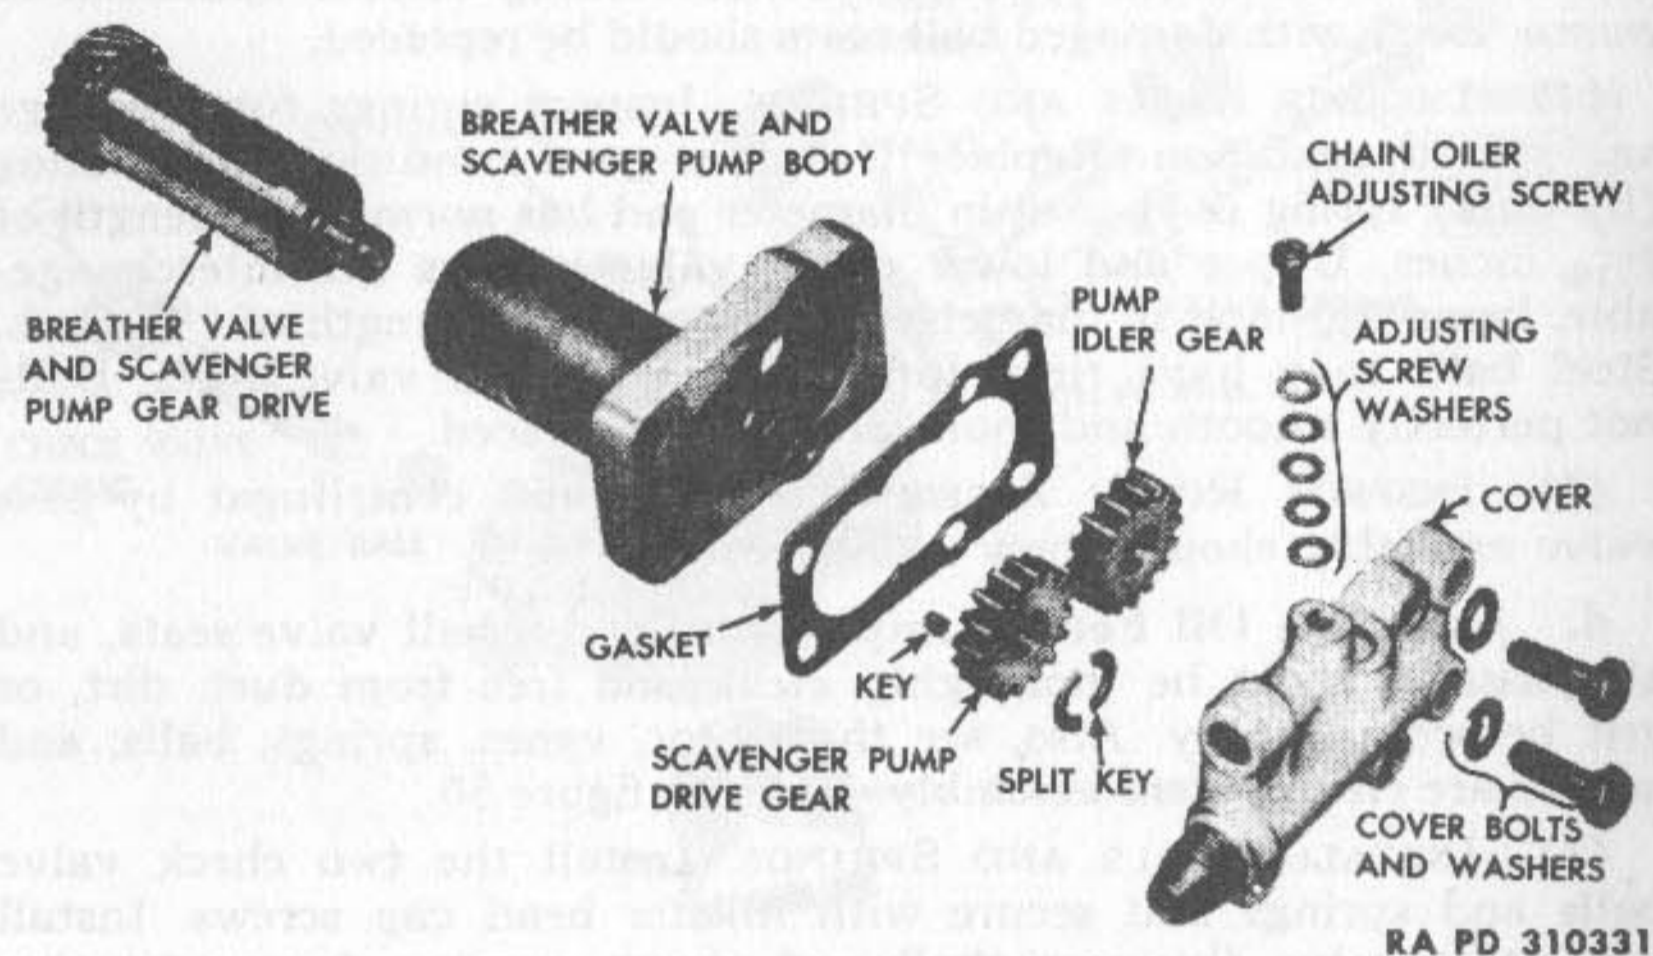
Scavenger Pump and Breather Valve, Disassembled
